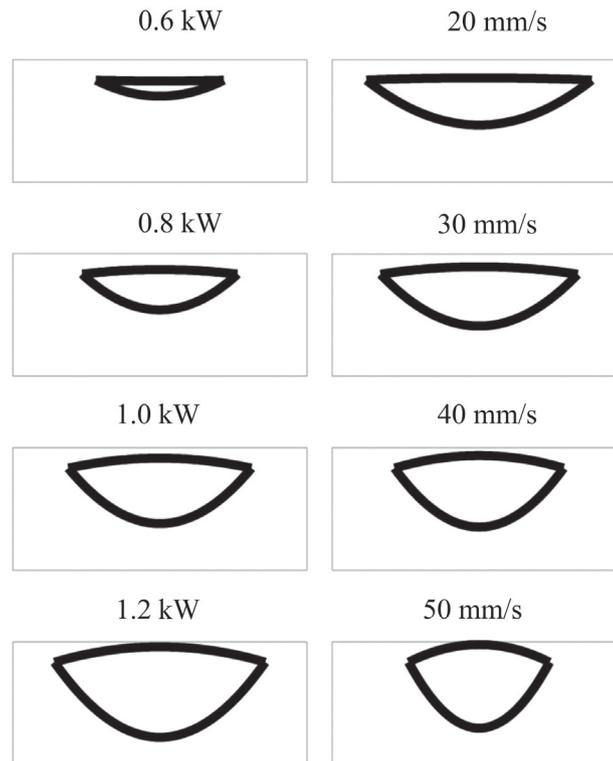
Calculated shape of the weld seam depending on laser power and welding speed:
